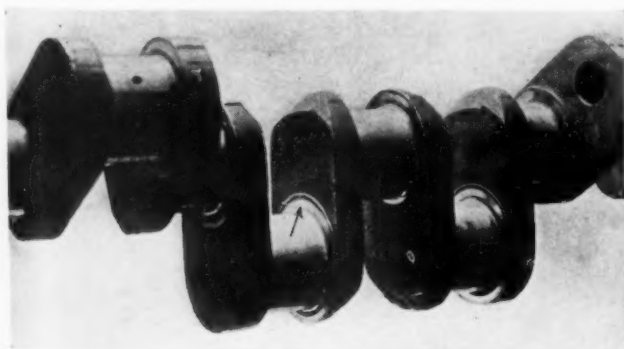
CRACK IN CRANKSHAFT WEB
